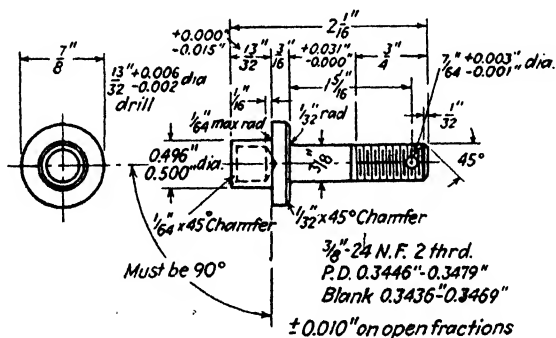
Cold-headed bolt with special drilled head. Steel used is S.A.E. 1020.
